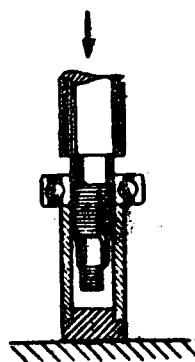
Mounting the bearing in the press using a pipe for applying pressure on the inner ring. (Mounting bearing on a shaft).
